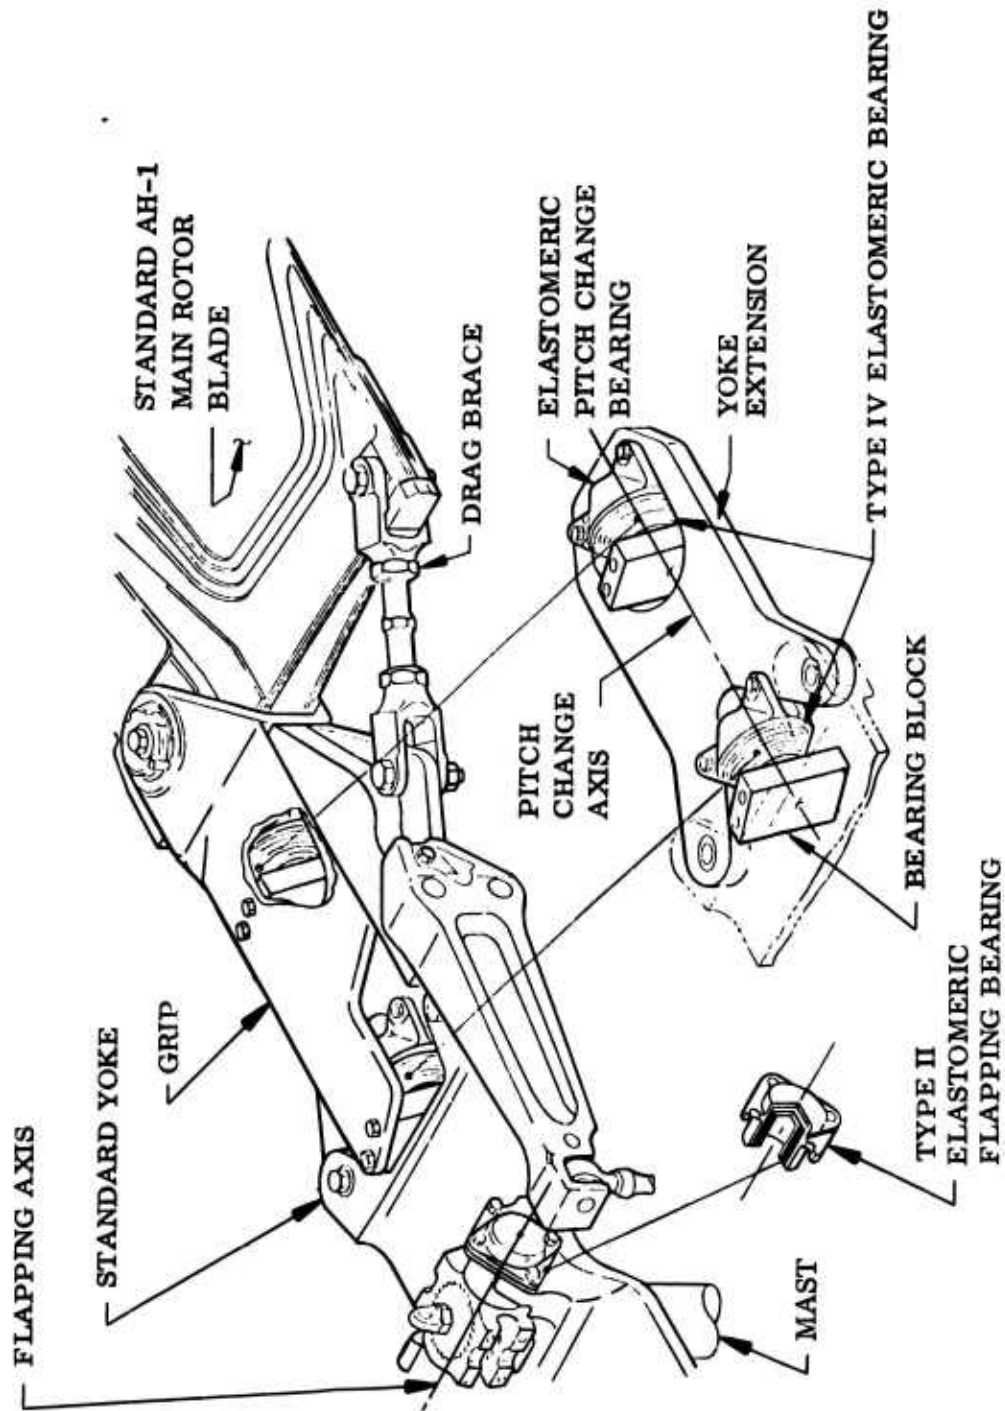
Type II and IV bearings for teetering and feathering of Bell 540 rotor
